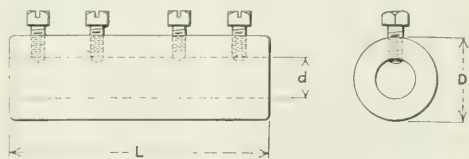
TUBULAR CONNECTOR FOR CRANE WIRING
